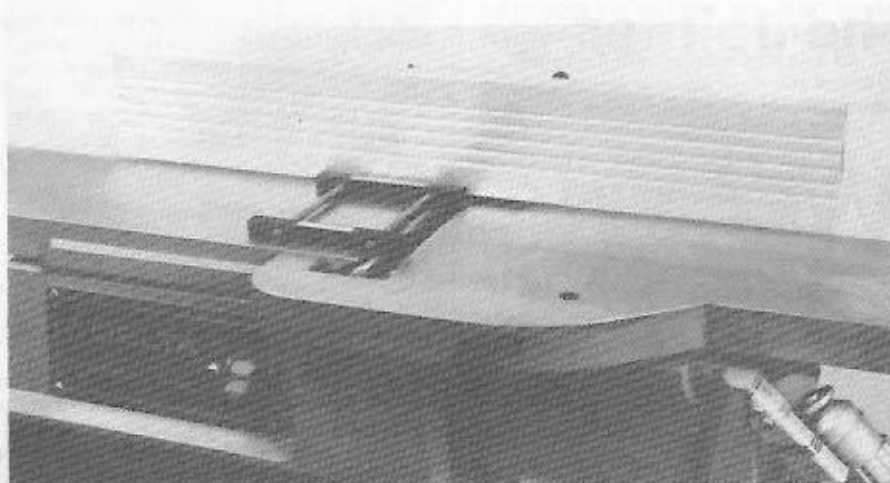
The Magna-Set jig has two adjustable bars which rest on the jointer outfeed table and extend over the cutterhead.
